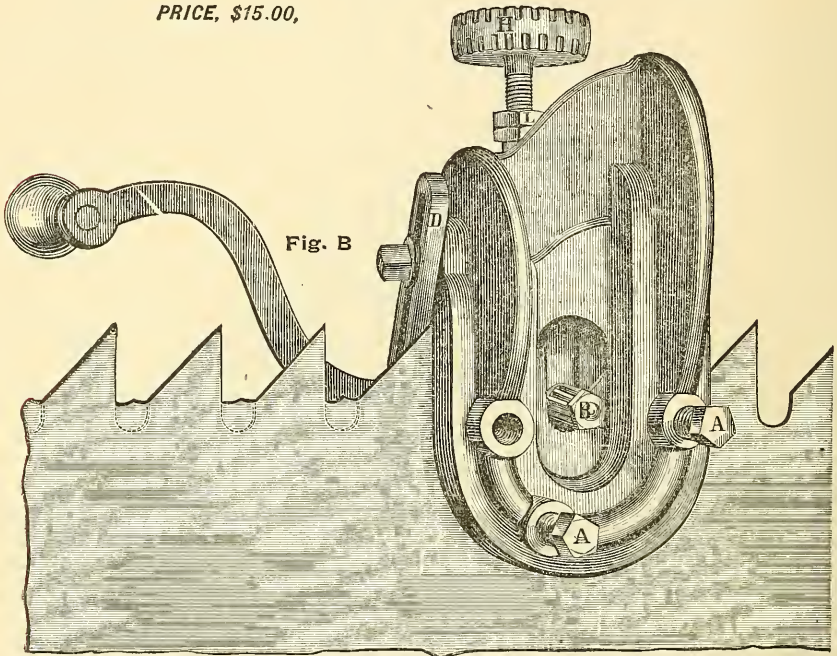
Fig. B shows the obverse side of Fig. A, with gummer in position on a straight saw. Place the cutter *B* in gullet of the tooth to be gummer. Secure the gummer in position by means of screws *A*; run the cutter back as far as necessary by means of screw *H*; set the jam-nuts *L* to correspond with the desired depth of gullet, and proceed to gum the first tooth, feeding with screw *H* until jam-nuts strike frame *K* (Fig. A). When this tooth is sufficiently gummered, remove the machine to the next tooth, and proceed as before until the work is finished.
